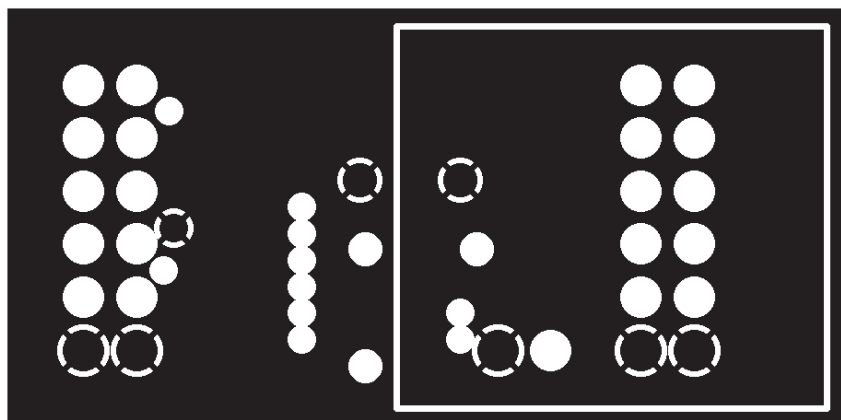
MAX14850PMB1 Peripheral Module PCB Layout—Inner Layer 2 (Power)
